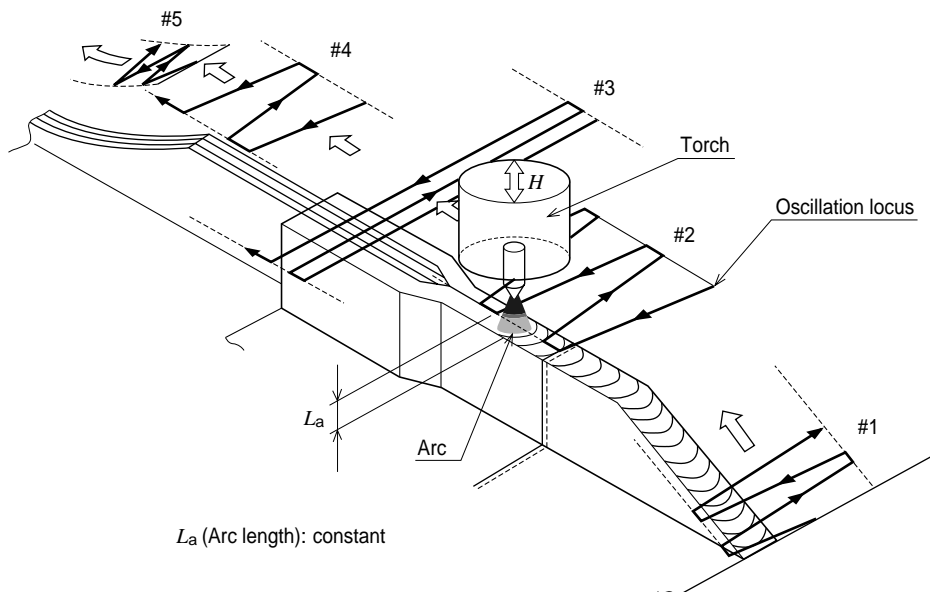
Seam tracking with arc length control and automatic setting of welding conditions
